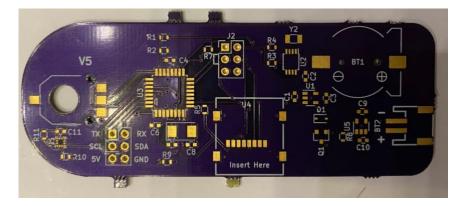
Older iteration of the circuit board fabricated by OSH Park, before applying any of the components
